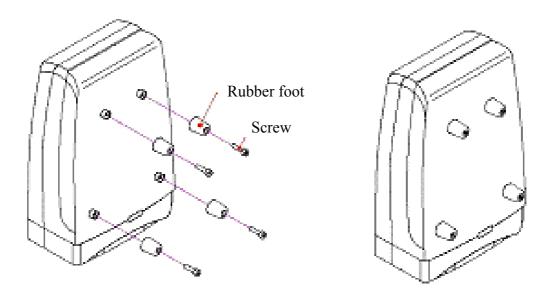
IDR horizontal desk mounting using supplied rubber pads and tapping screws
